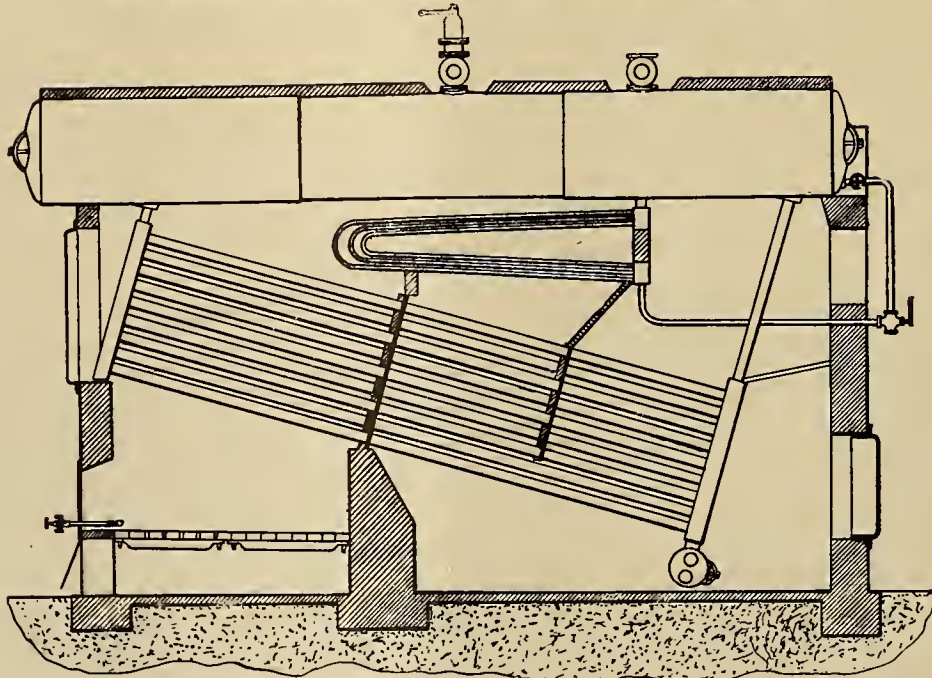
S. &amp; P. Furnace Arrangement Under B. &amp; W. Boiler.
